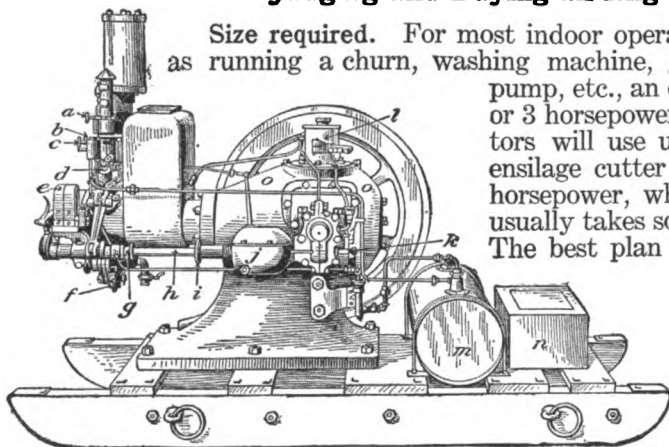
Horizontal, internal combustion engine of a standard farm type mounted on skids for easy transportation about the farm. A truck may replace the skids. One fly wheel has been removed to show parts as follows: *a* gasoline valve; *b* water valve; *c* kerosene valve; *d* intake valve; *e* magneto; *f* exhaust valve; *g* compression relief cam; *h* side shaft; *i* speed changing device; *j* governor; *k* fuel pump; *l* mechanical oiler; *m* fuel tank; *n* tool box; *o* crank case (enclosed)
